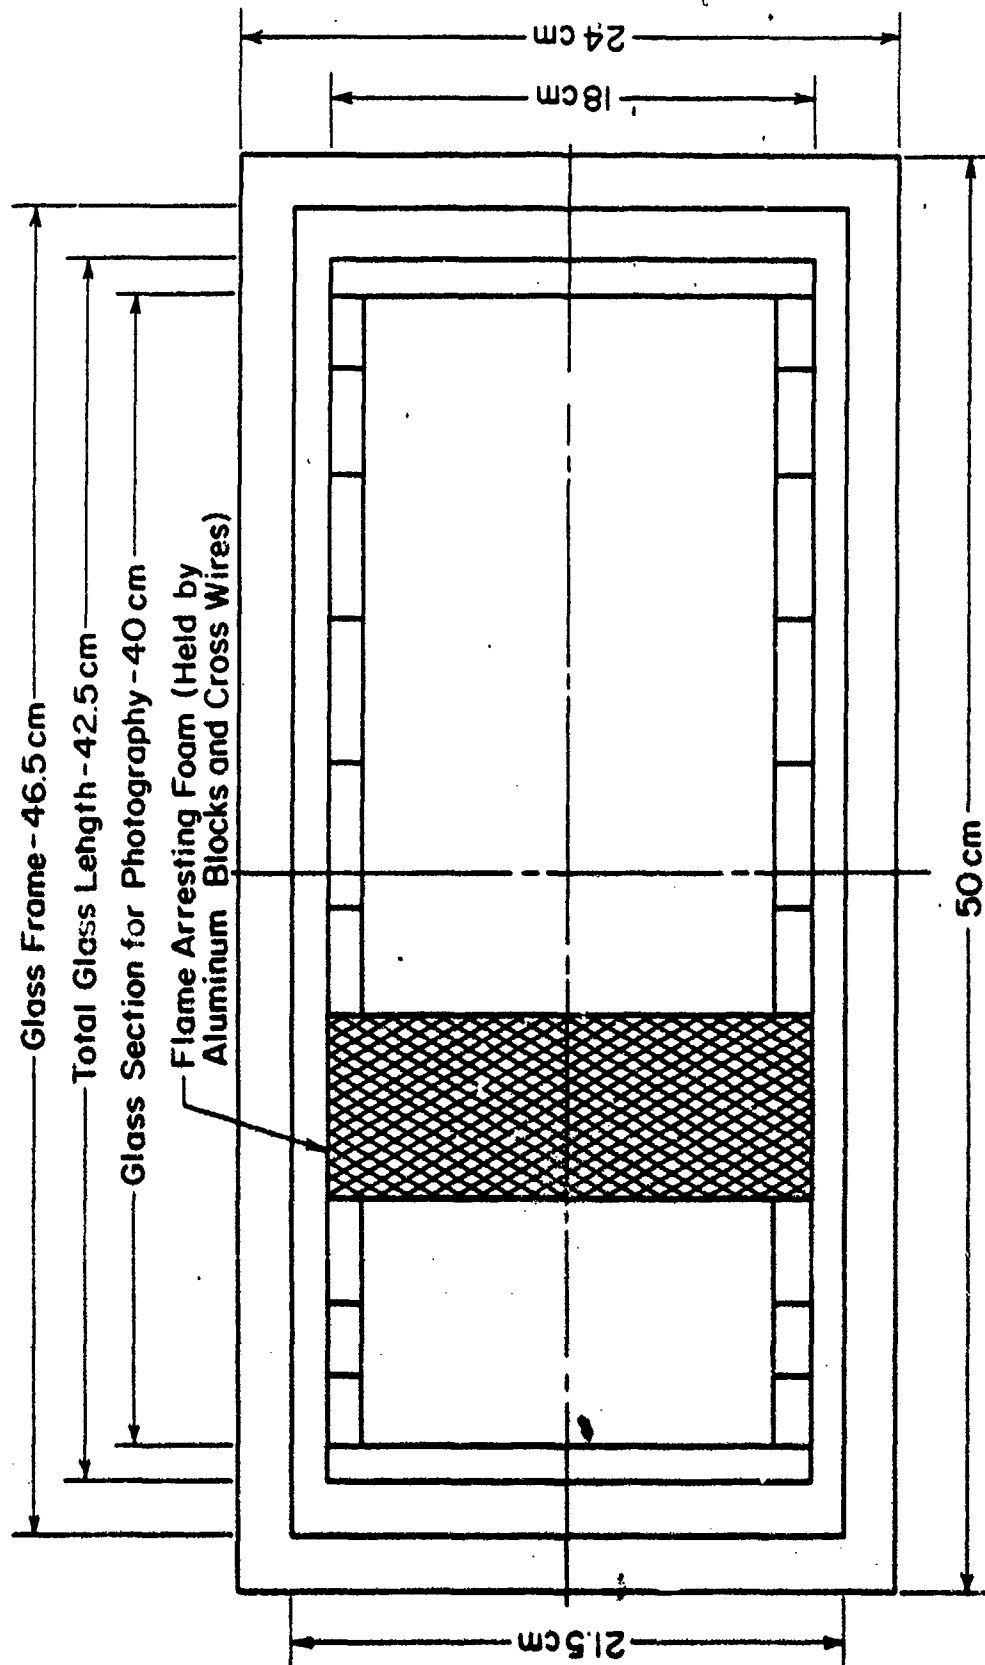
Test section detail (scale 1/2 full size) of flame arrester
